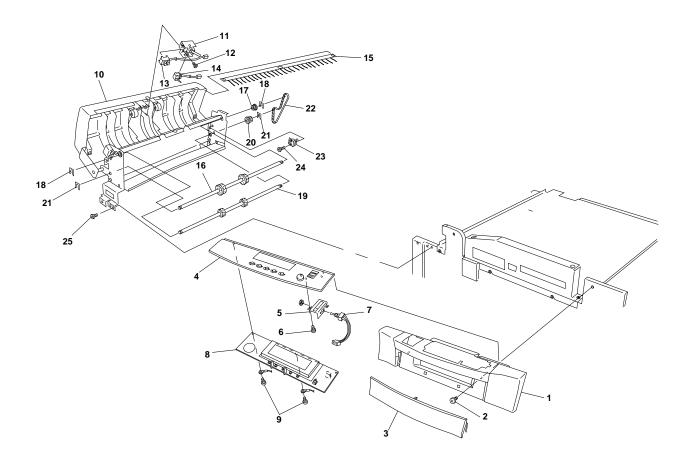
Ejection Unit and Operator Panel Parts Locational Diagram
